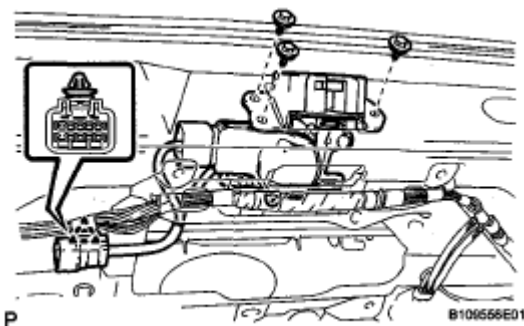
Identifying Back Door Lock Assembly Bolts (W/O Power Back Door)
